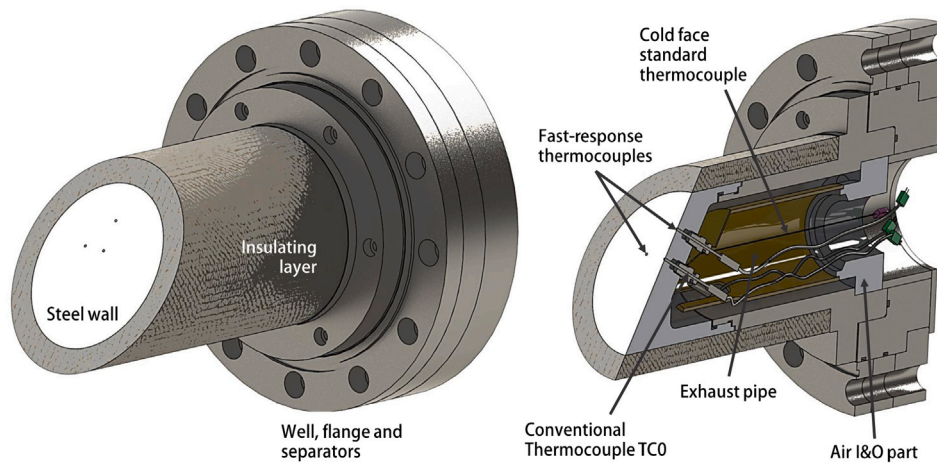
Thermo-well assembly ( $d_w = 50$  mm;  $\theta_w = 60^\circ$ ). Left: Isometric view. Right: Isometric view with section cut.
